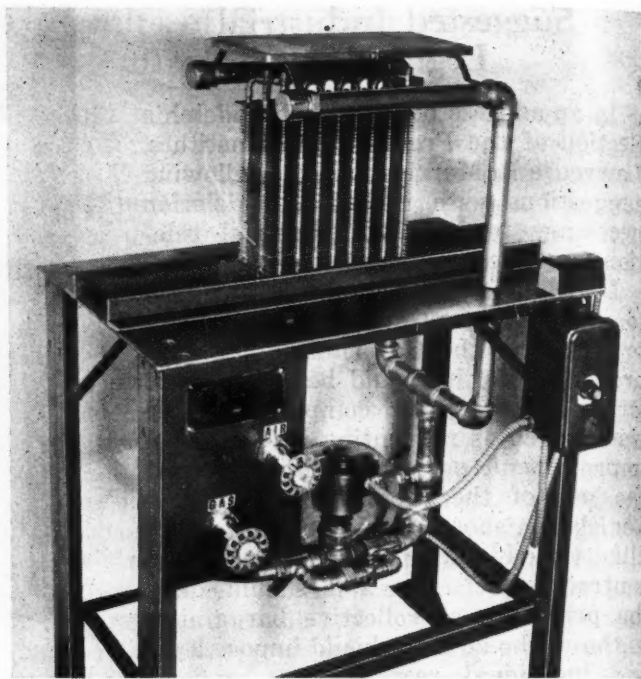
Equipment for Automatically Silver-soldering Refrigerator or Condenser Coils
